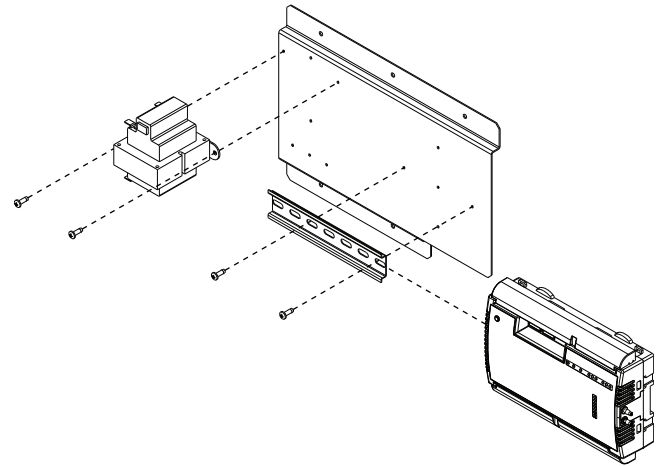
TruVu Transformer and TruVu Controller Mounting
